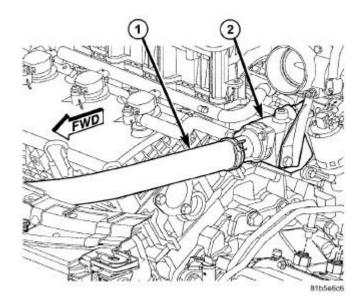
Upper Radiator Hose From Thermostat Housing Courtesy of CHRYSLER LLC
